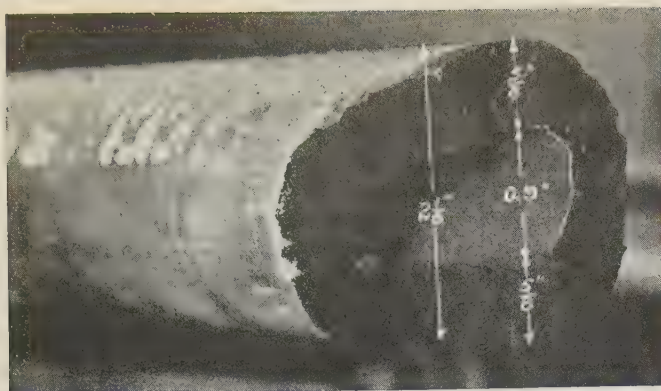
Section of extra heavy iron pipe after rupture by explosion
